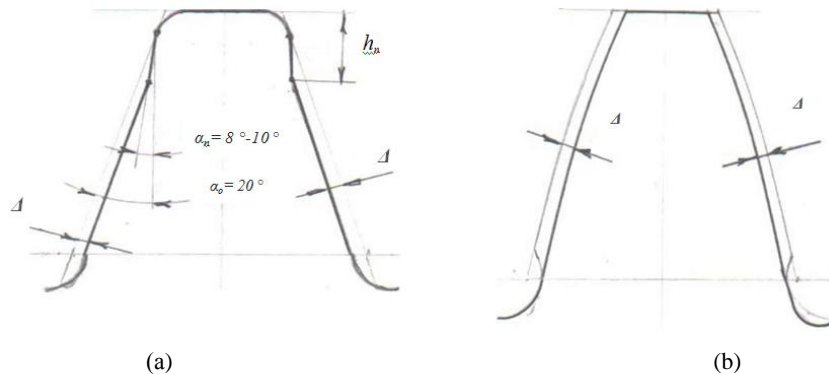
Wheel teeth precutting: a – a tooth of hob cutter with a prominence; b – a wheel tooth machined with Δ allowance: h_n – the prominence height, α_0 – the angle of original profile, α_n – the angle of prominence profile
